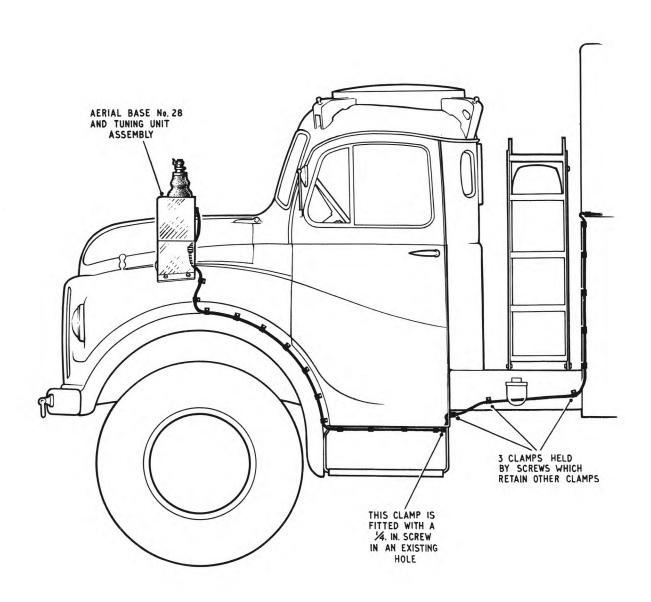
DISMOUNTABLE VHF ATU ON THE LH FRONT WING
